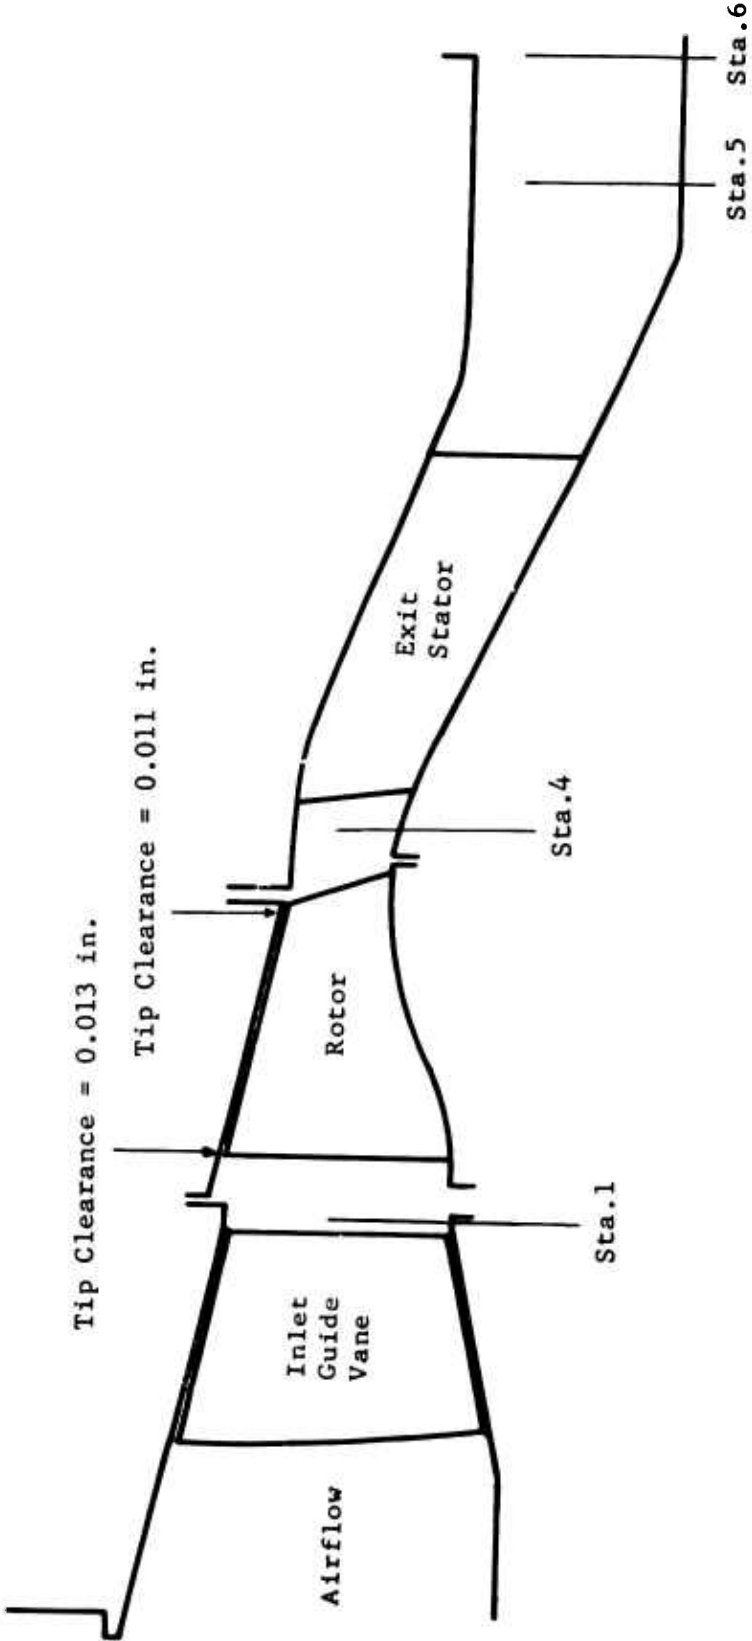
Compressor Flow Path for Builds 7, 8, and 9.
